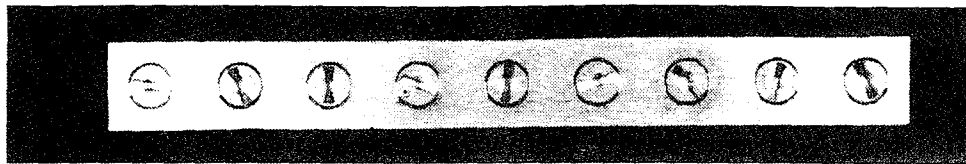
Completed Fastener Bar Specimen Ready For Salt Spray Testing
